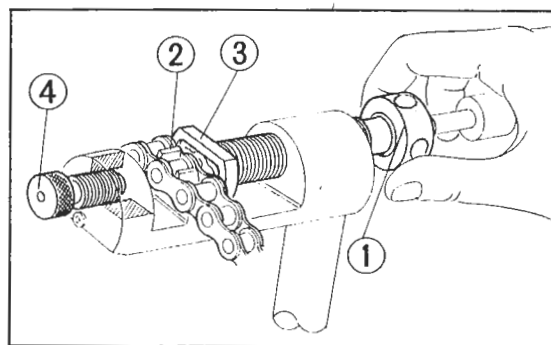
① Pressure bolt ③ Pressure holder
